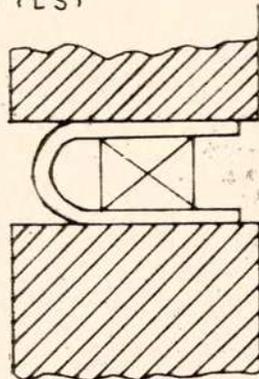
BEND TEST THROUGH 180° OVER A SPECIFIED RADIUS
